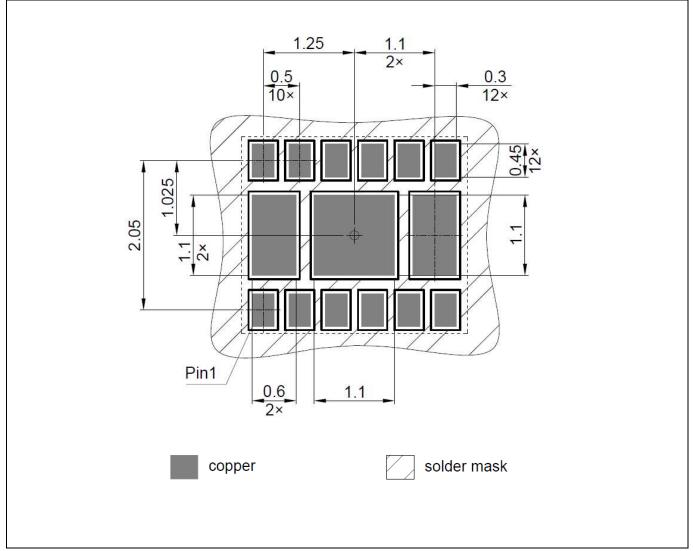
PCB Metal Pad Sizing and Spacing (all dimensions in mm)
